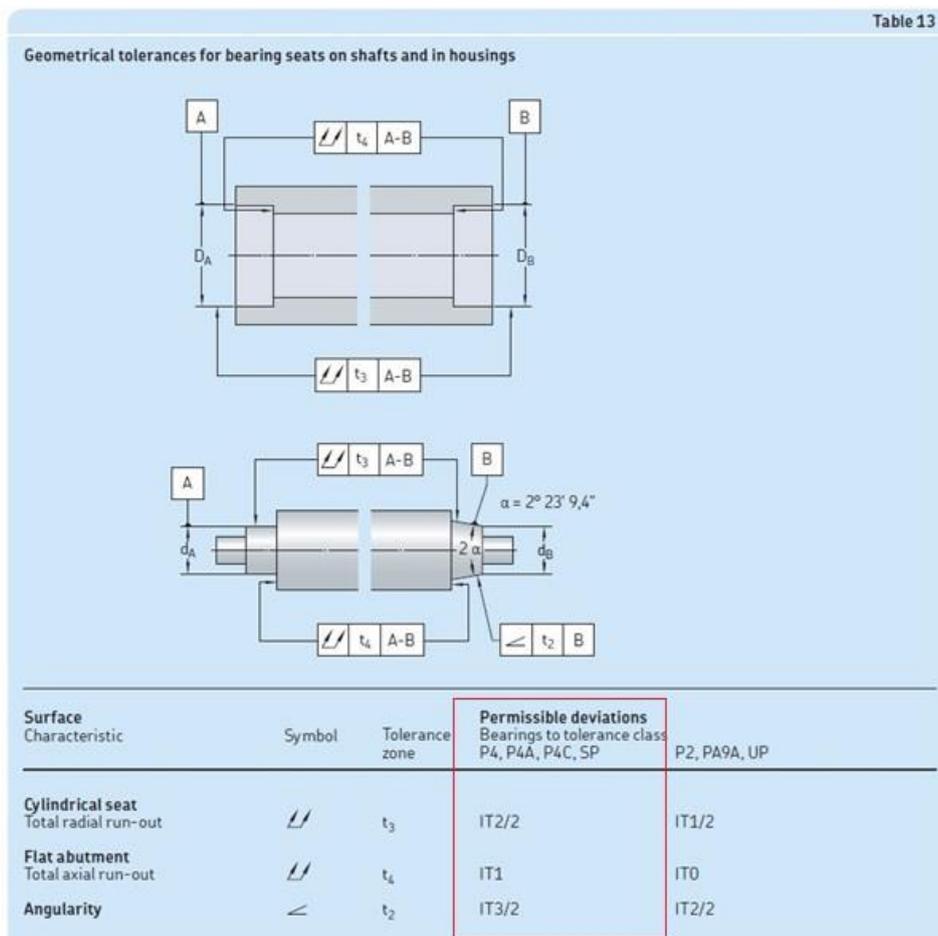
Geometrical tolerances for bearing seats on shafts and housings. [17]
